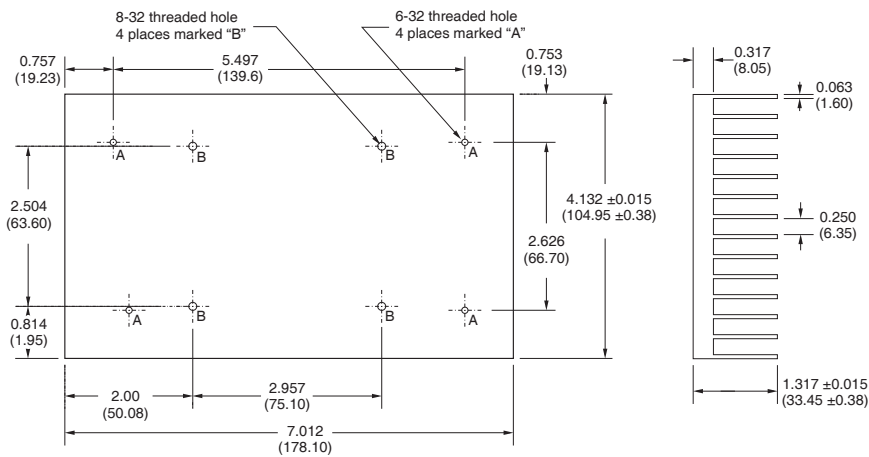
H-100 Heat Sink, Dimensions in Inches (mm)
